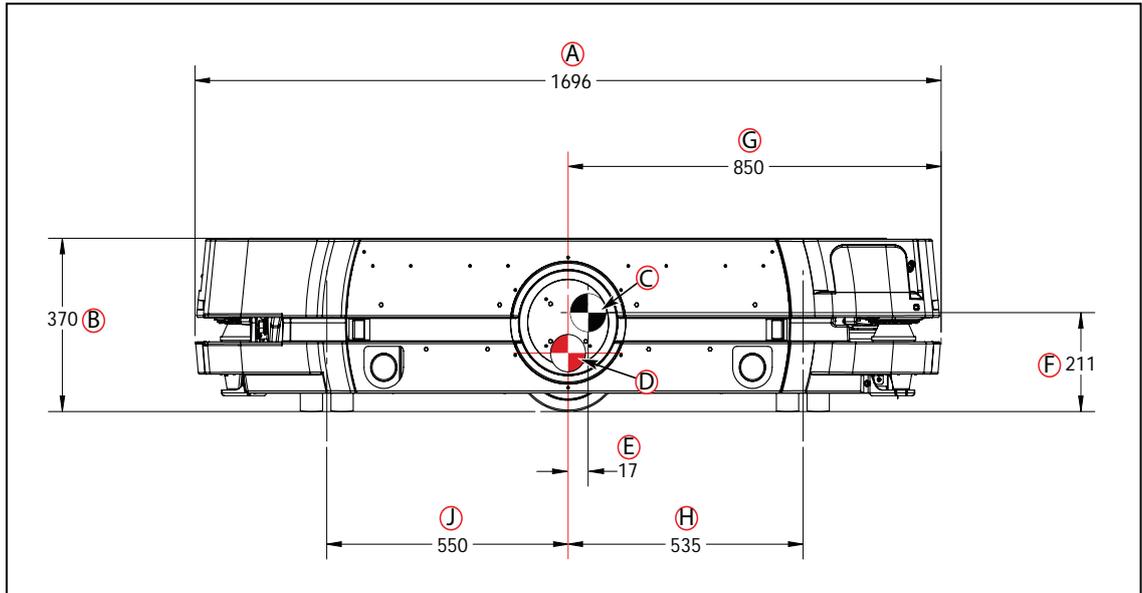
HD-1500 Platform Dimensions - Side View (units are in mm)
